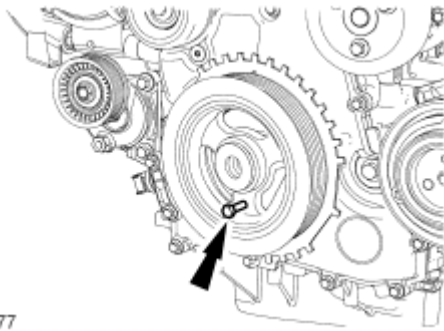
Identifying Standard 6 mm x 18 mm Bolt
